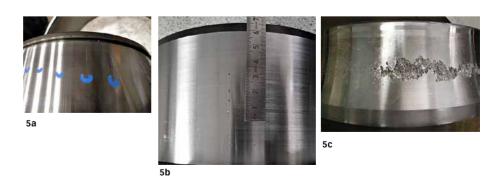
Examples of typical bearing types that can be affected: a) tapered roller bearing, b) cylindrical roller bearing, and c) spherical roller bearing.
